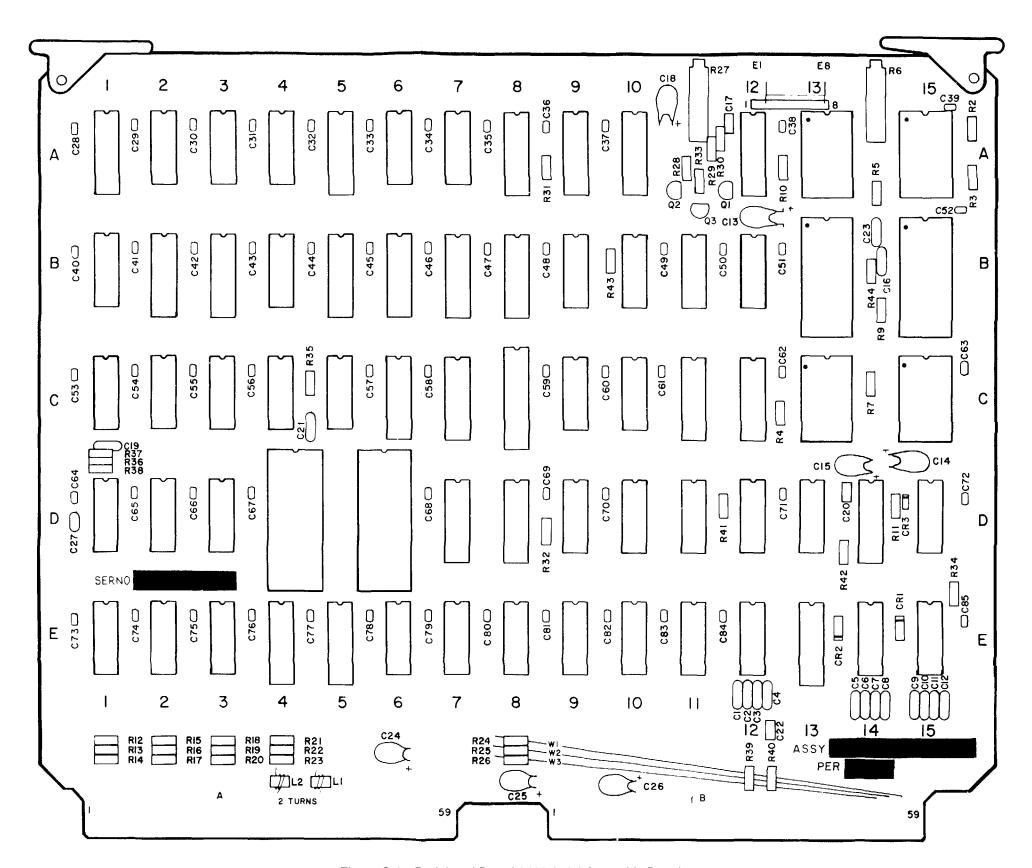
Peripheral Board 0100-2724 Assembly Drawing
